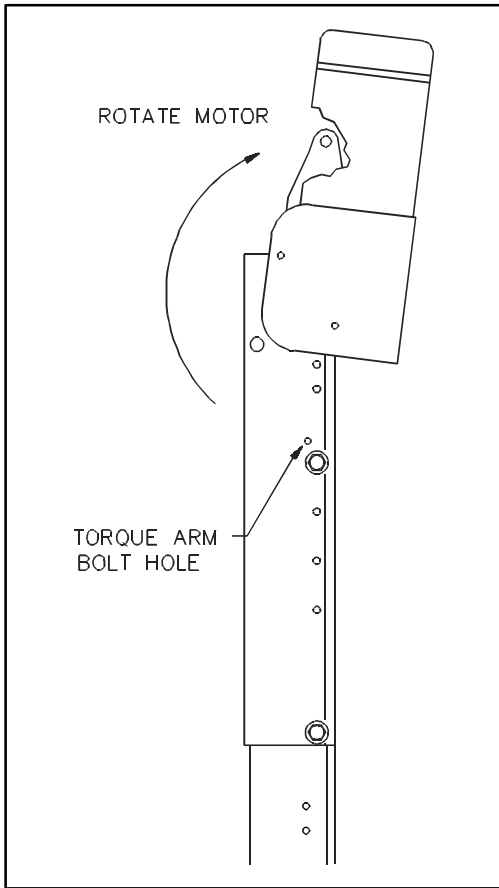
ROTATE GEAR MOTOR ASSEMBLY
